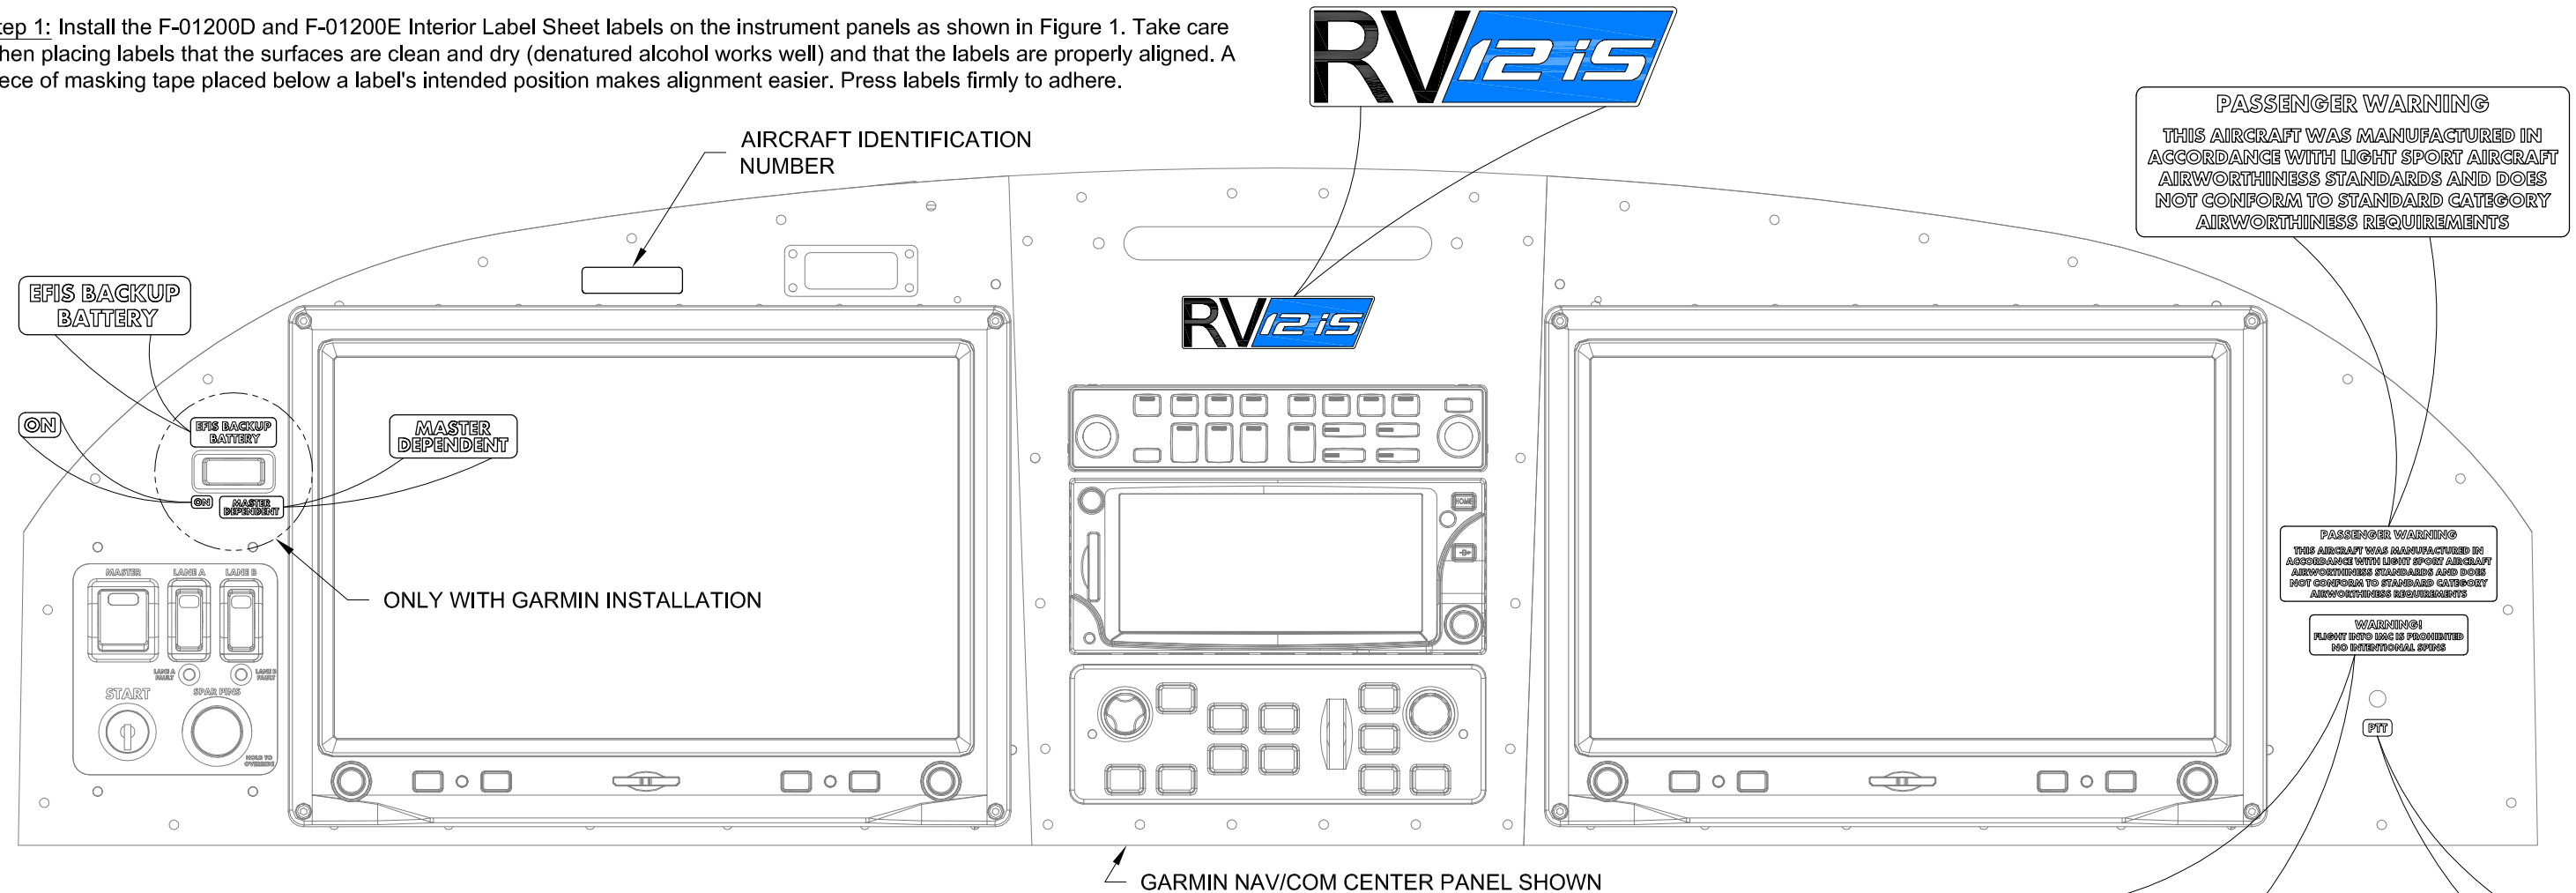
INSTRUMENT PANEL LABEL PLACEMENT
